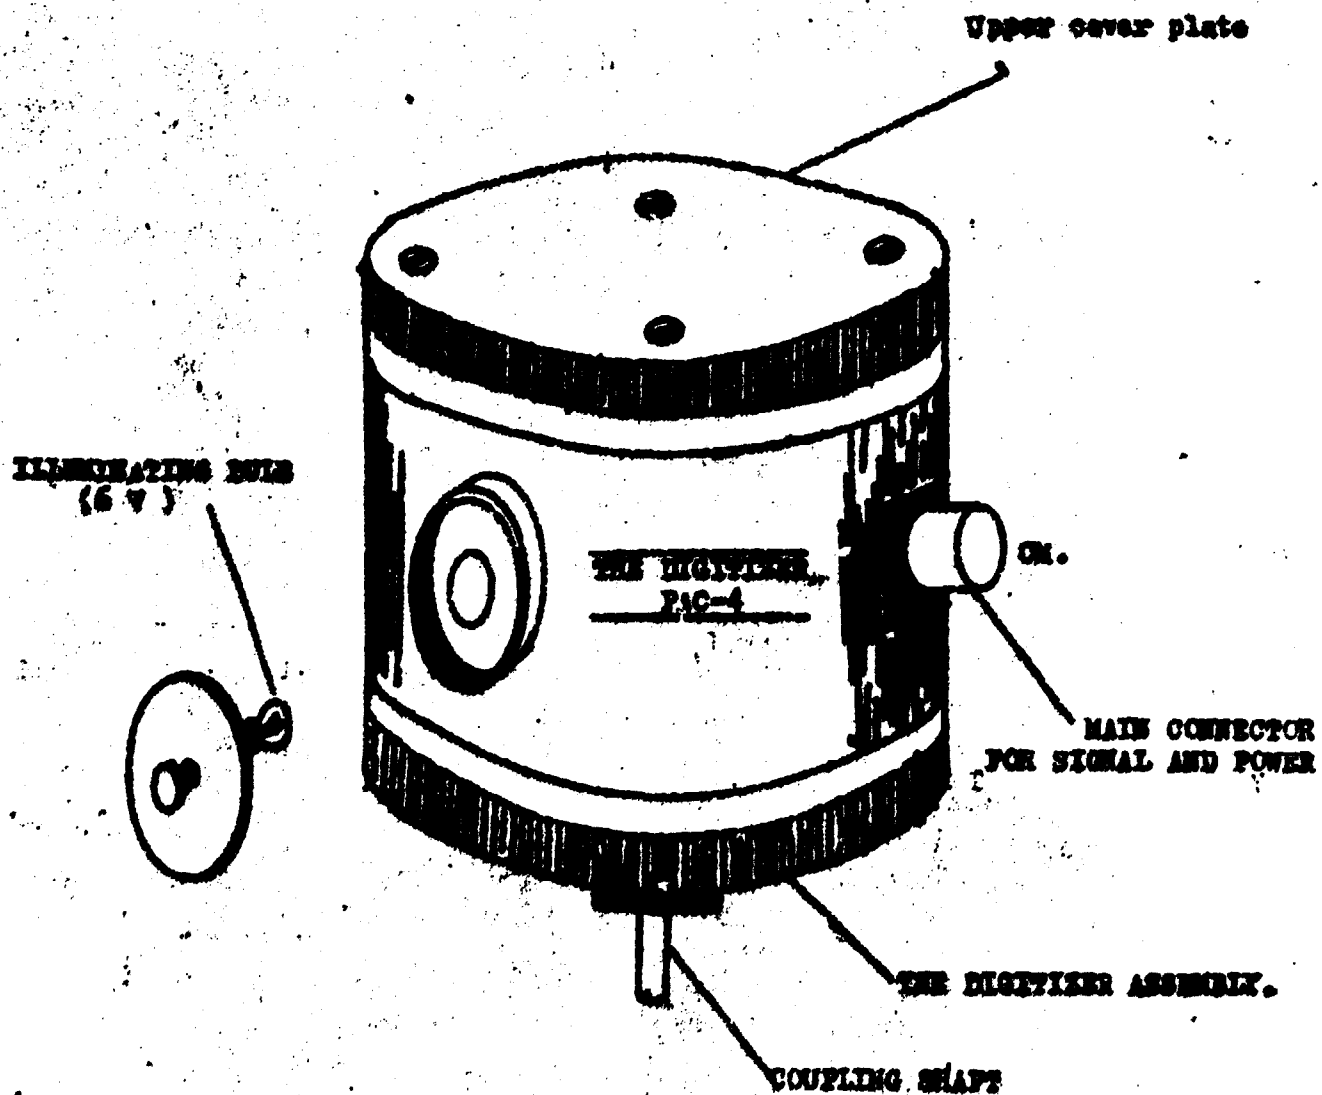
THE DISFIXER (NEW VERSION PAC-4) MAIN ASSEMBLY.
